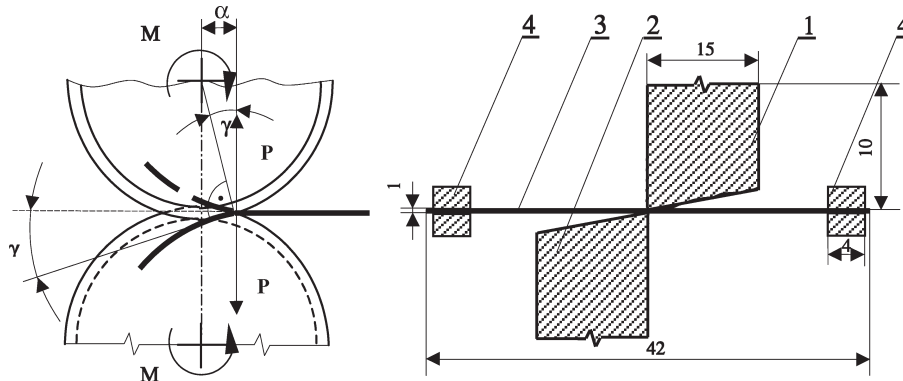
View of test stand: 1, 2 – rotational tools, 3 – cut metal sheet, 4 – plate-gripping tongs
